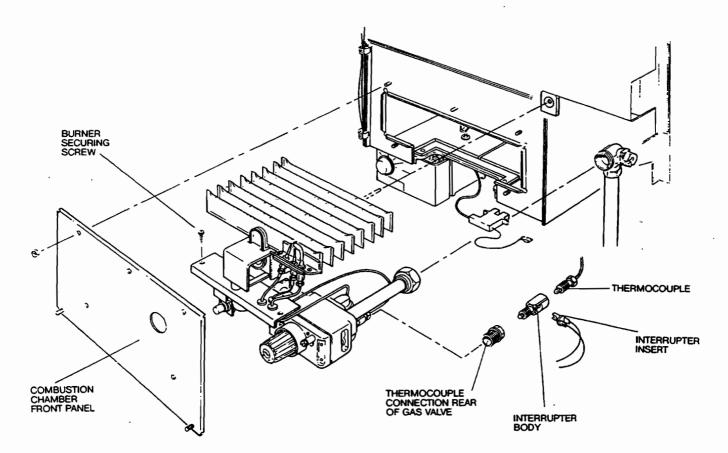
BURNER AND GAS CONTROL ASSEMBLY
